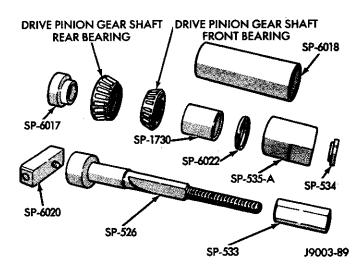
9 1/4-Inch Ring Gear/Pinion Gear Adjustment Tools
